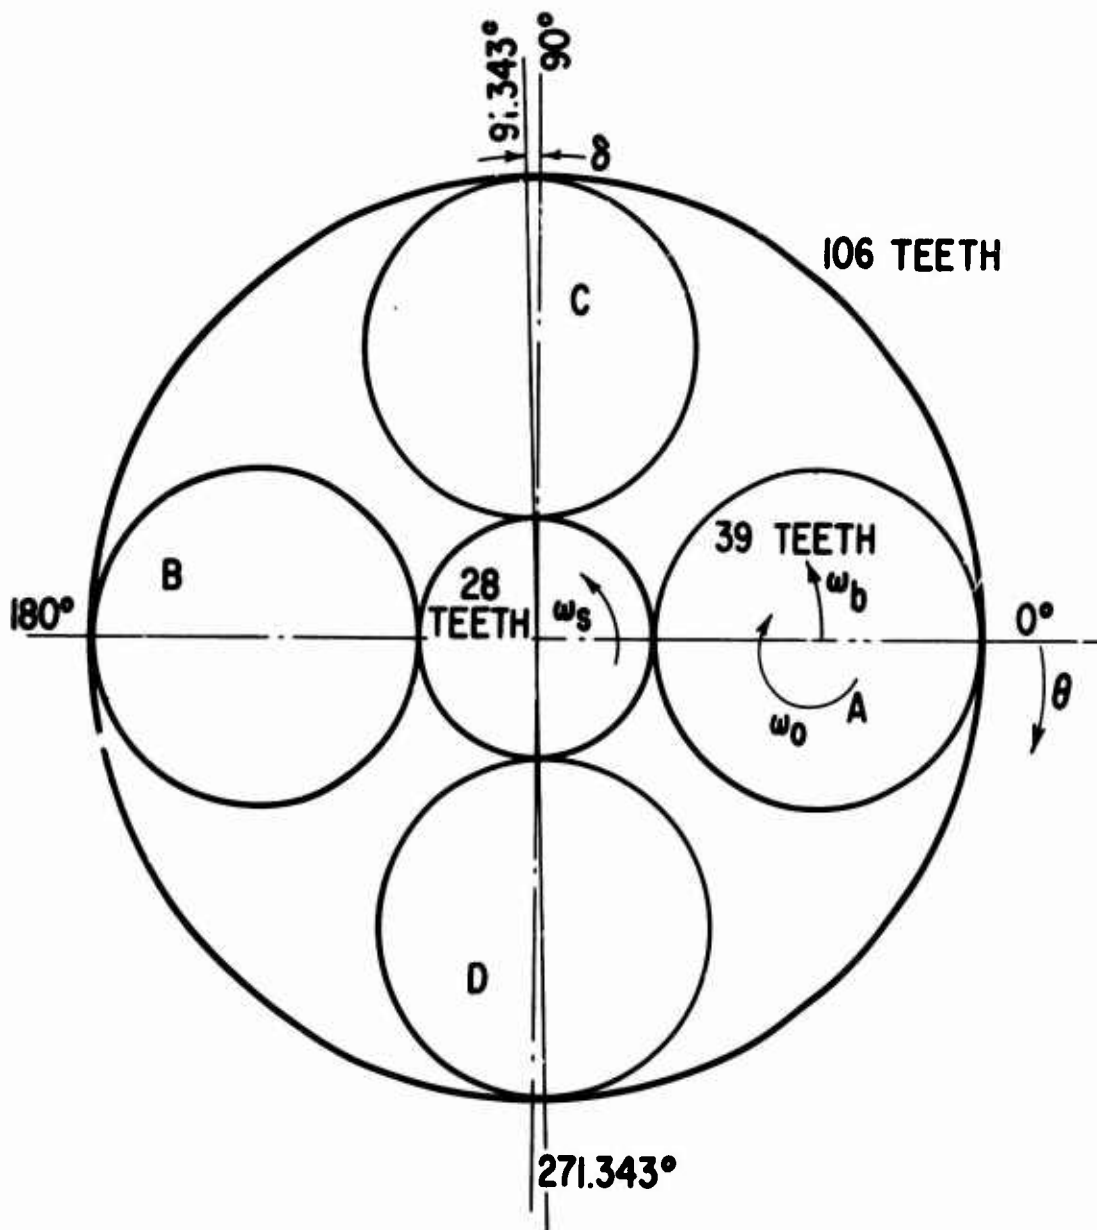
CH-47 Forward Rotor-Drive Gearbox
